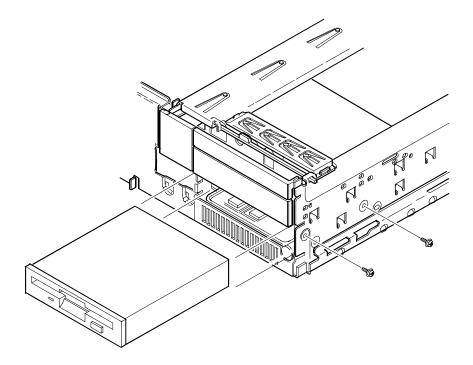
10 Removing the 3½-Inch Diskette Drive
